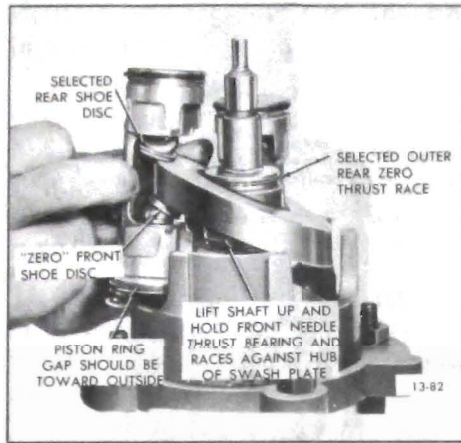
Installing Piston Assembly in Front Cylinder Half
